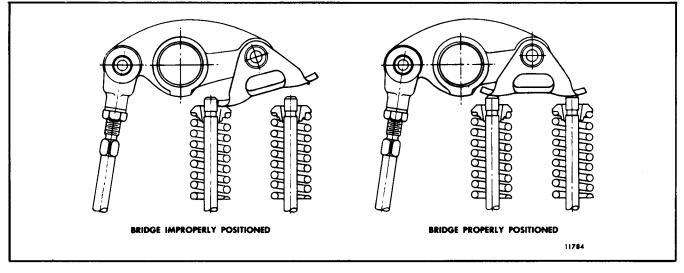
Relationship Between Exhaust Valve Bridge and Valve Stems
